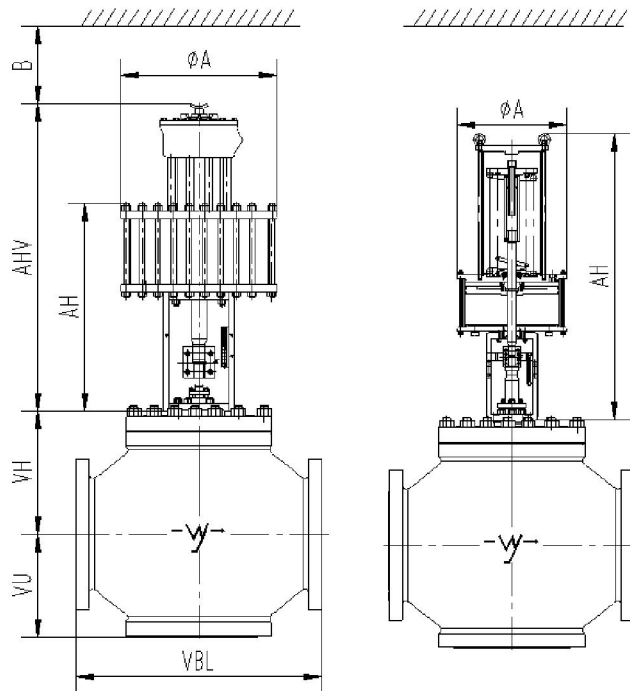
Overall drawing with pneumatic piston actuator for DN450-DN600(18"-24")
